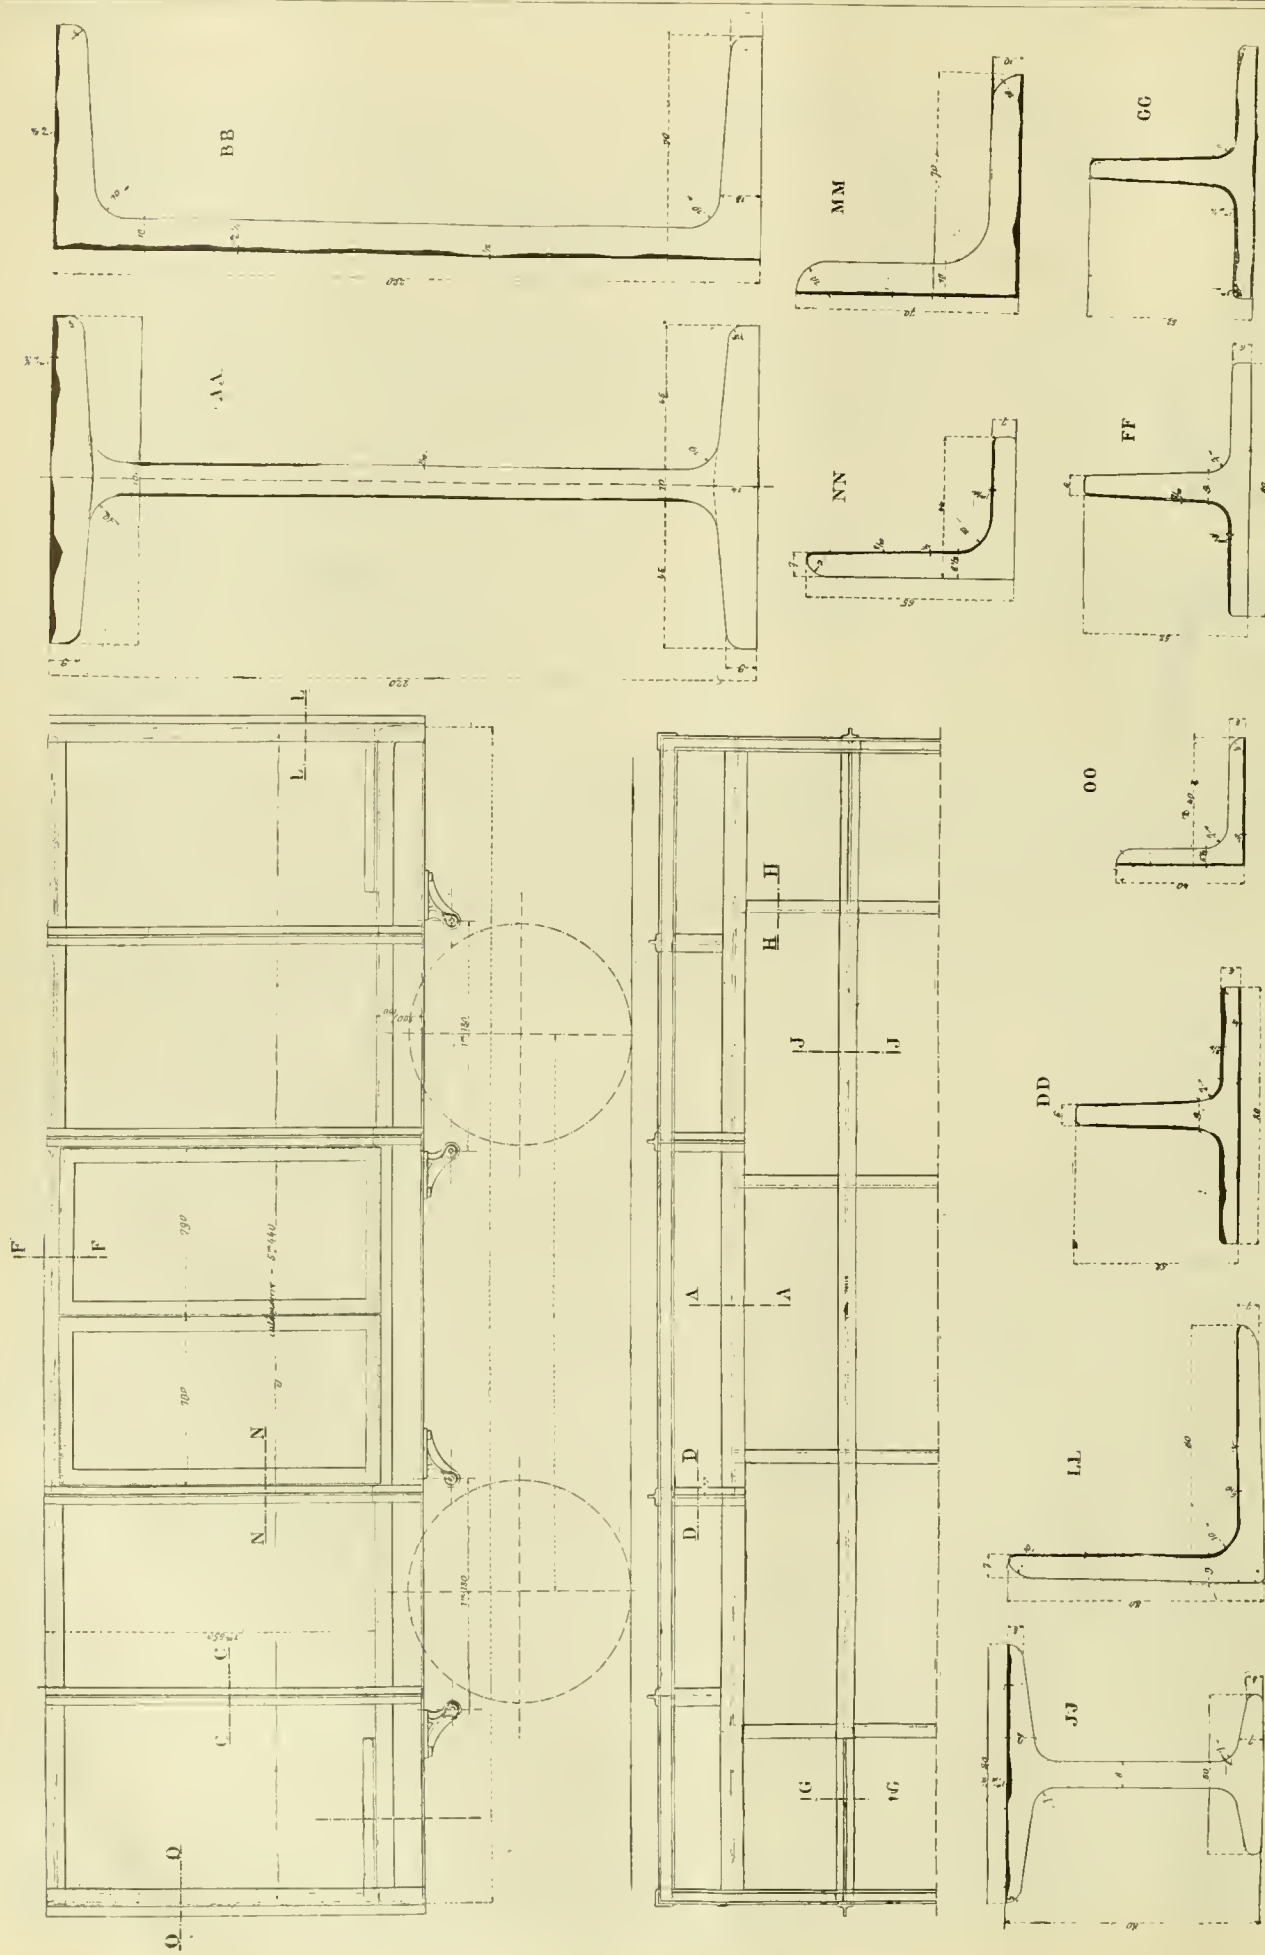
Elevation, Half-plan and Sections Showing Corrosion of Iron Members of Cars with Iron Upperframes and Iron Underframes, Built by the Eastern Railroad in France in 1869.
